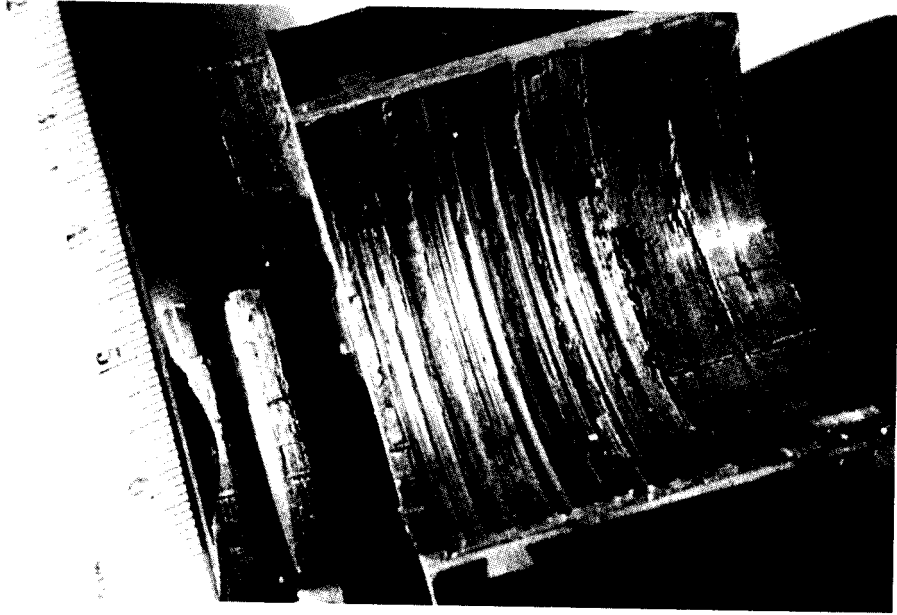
Marine boiler feed pump bearing failure caused by lack of sufficient lubrication due to presence of dirt particles. Courtesy Ingersoll-Dresser Pump Company.
